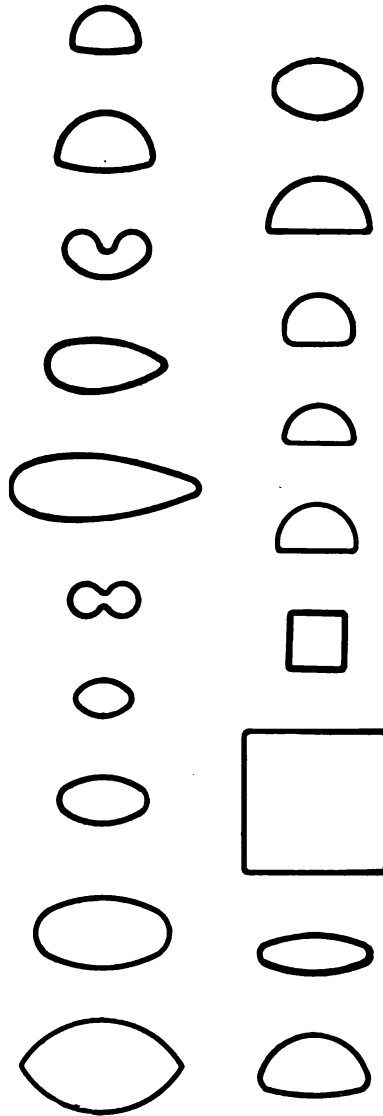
Sections of Struts used in Aeroplane Construction.
